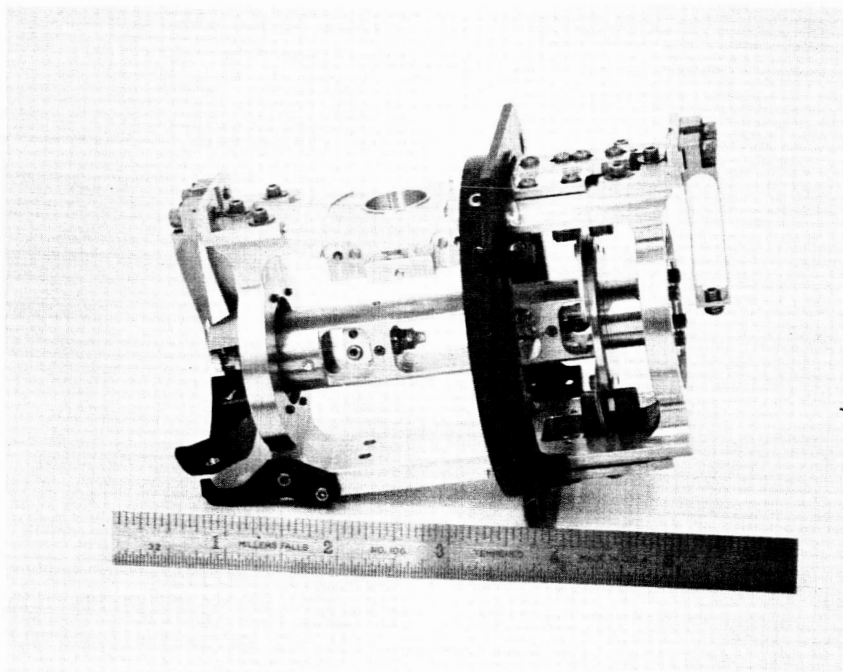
Passive Hysteresis Damper Engineering Unit No. 1 (Cover Removed)
